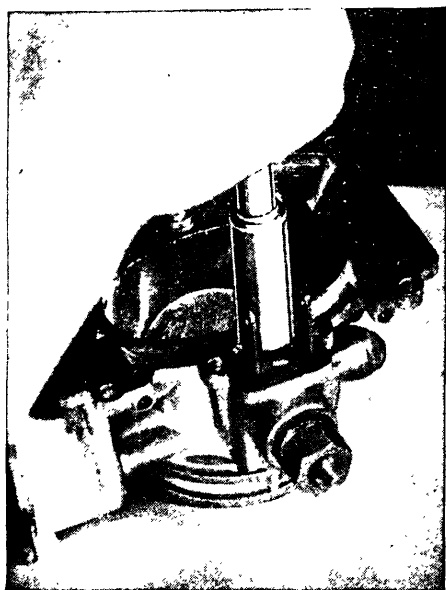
Assemble float needle valve seat, gaskets and hanger (use tool T-20140). Assembl fl at needle valve and clip to float lever
